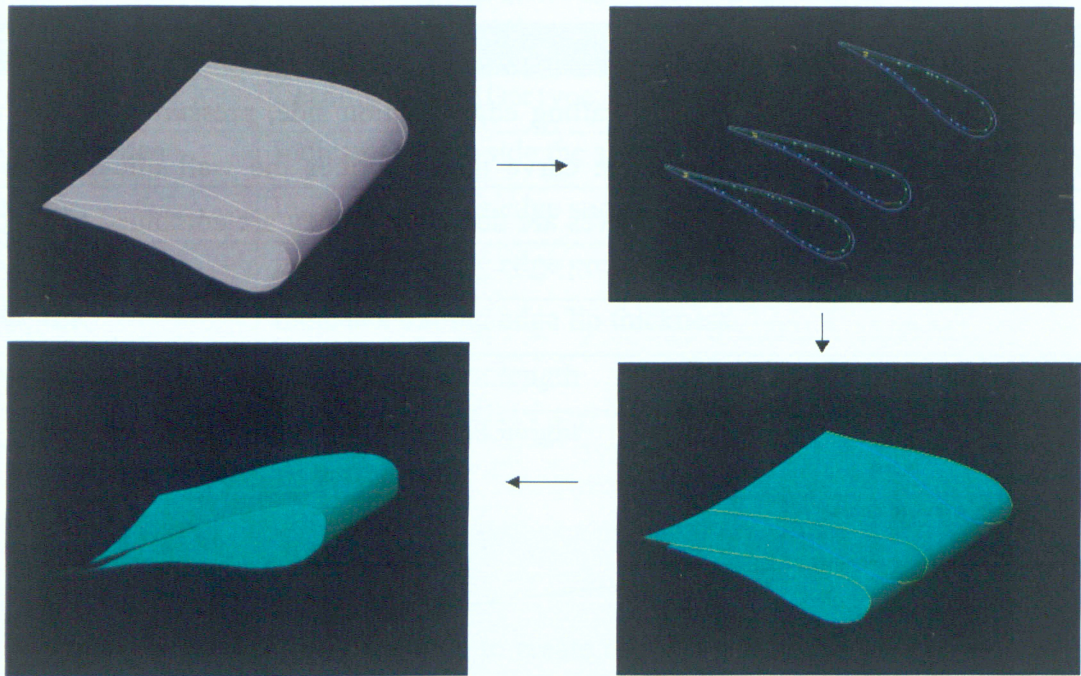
Wall thickness creation process. (1) The external airfoil sections are obtained. (2) The wall thickness is defined at the sections. (3-4) The 2-D sections are splined to create a surface wall thickness definition
